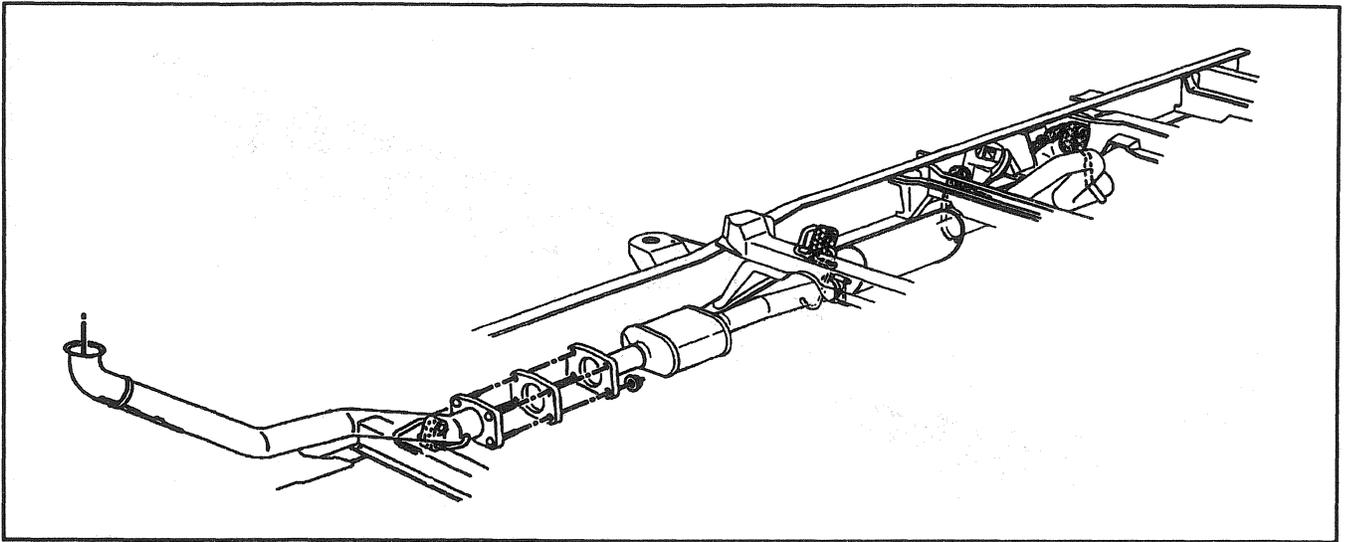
Exhaust System - C 310 Cab Chassis w/6.5L Diesel Engine over 15,000 GVW
